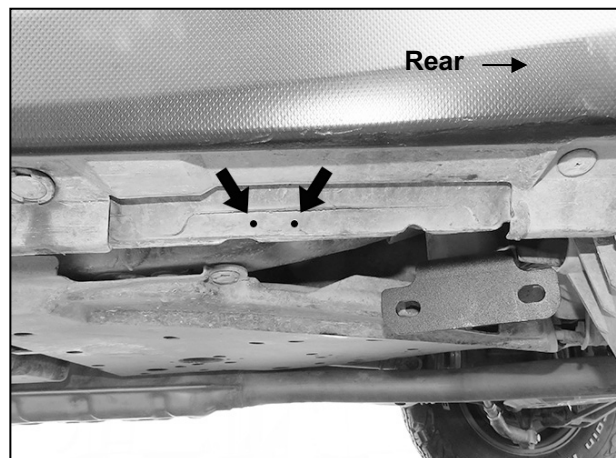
Attach driver/left rear Support Bracket to rear end of Rocker Slider
